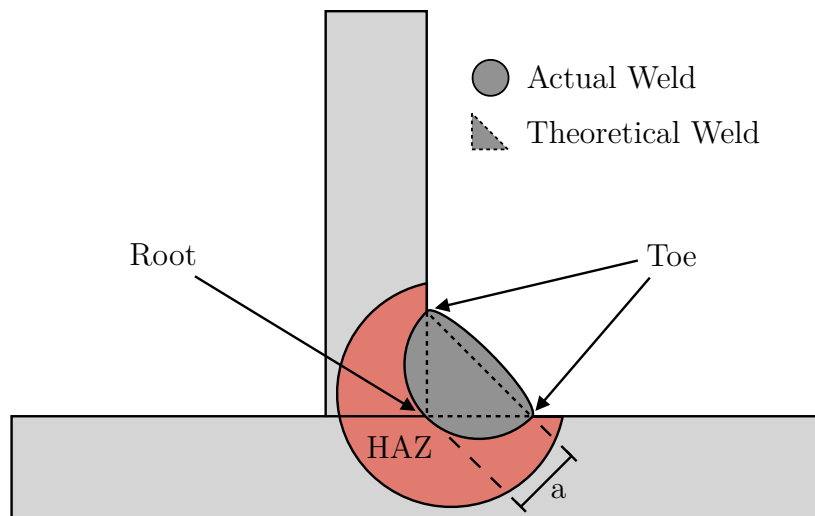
Geometrical representation of a one sided fillet weld, showing the differences between the actual and theoretical weld.
